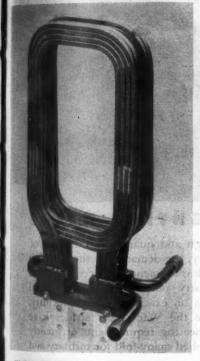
B—Secondary-coil assembly of water-cooled welding transformer.
